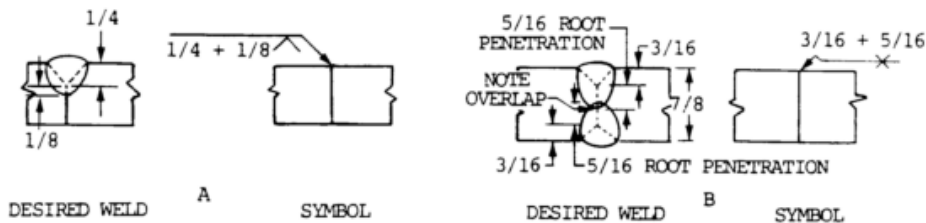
Dimensions of groove welds with specified root penetration.
